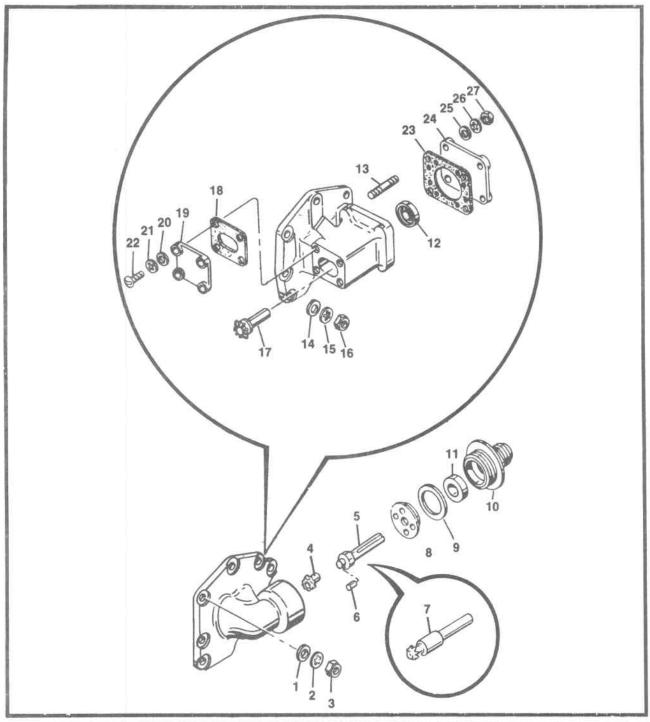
B. OIL PUMP COVER AND TACHOMETER DRIVE.
